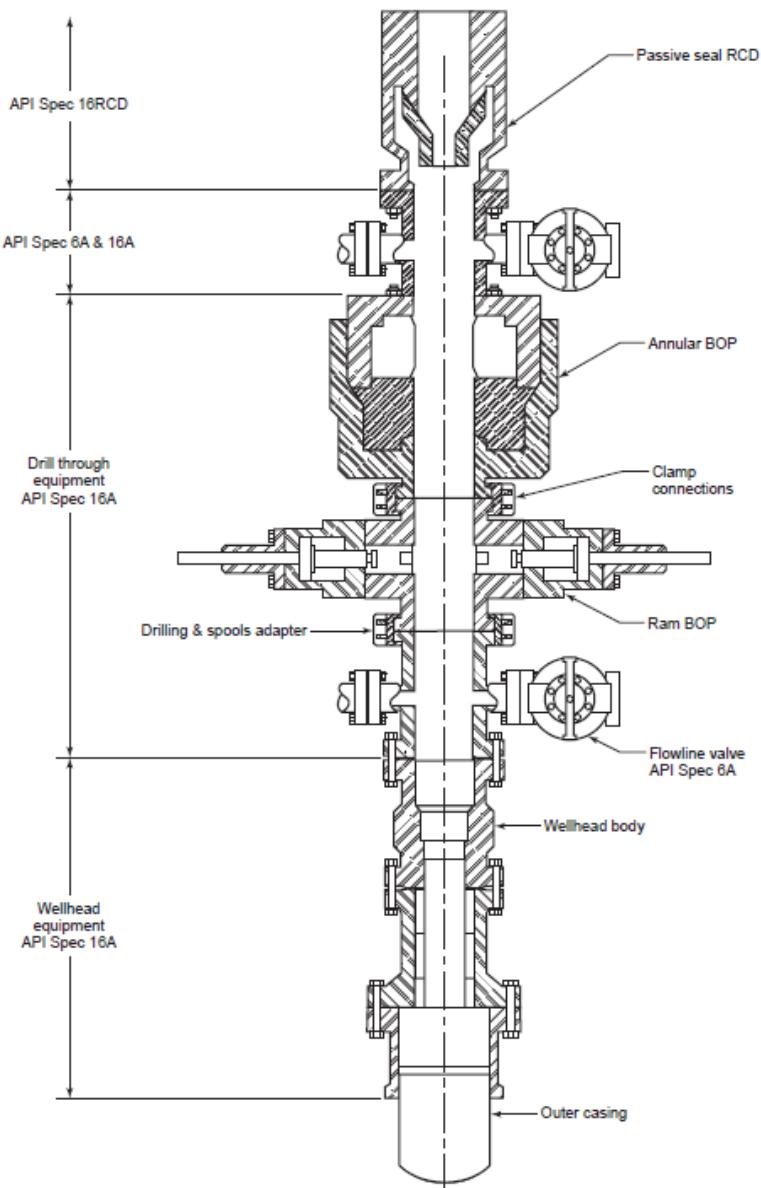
Typical API Surface Stack for Passive Rotating Control Device¹
